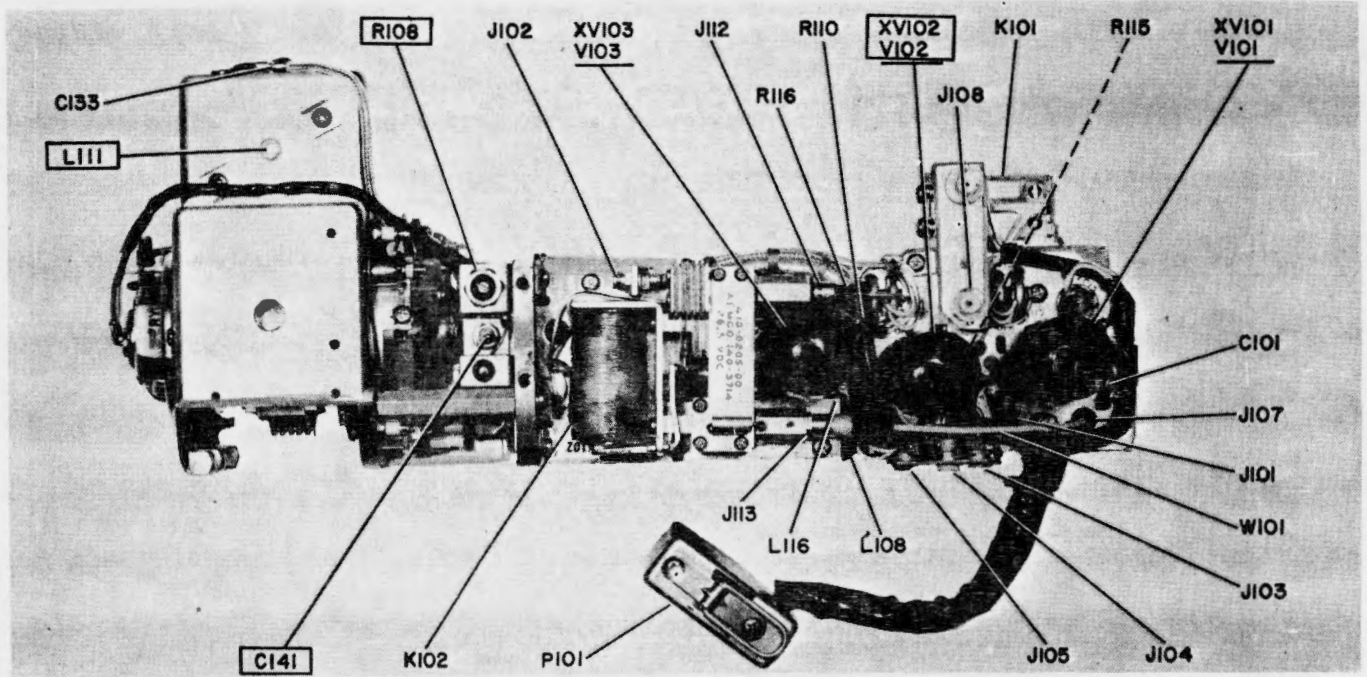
RT-581( )/URC-9, RF and PA Amplifier Assembly, Top View
